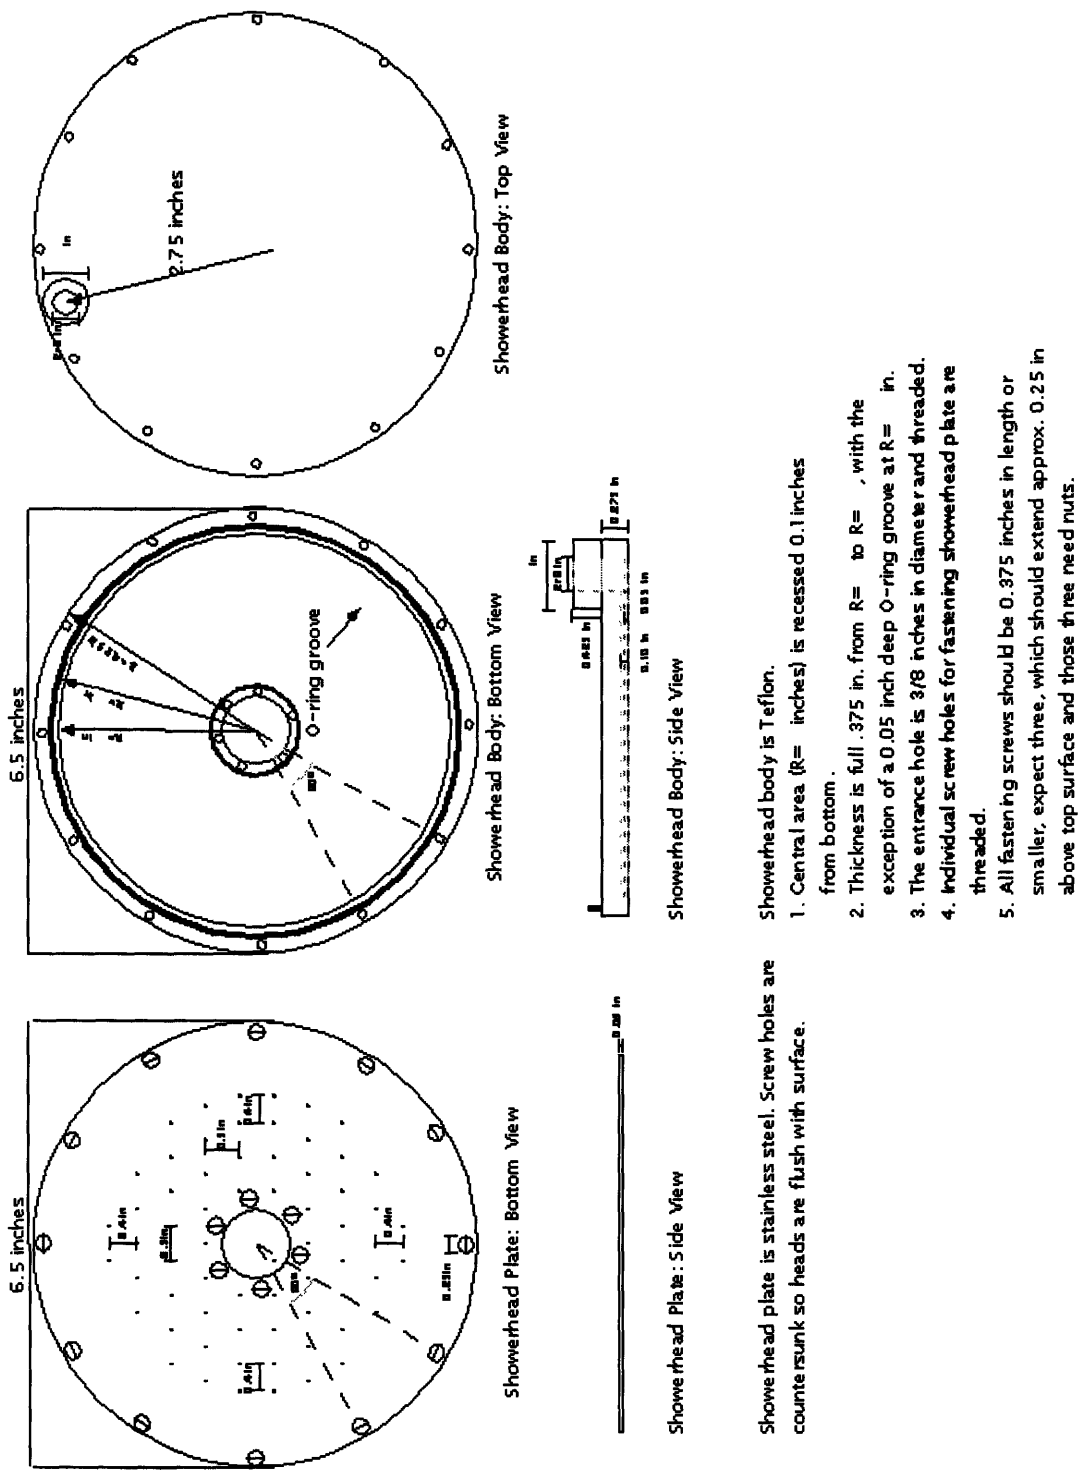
Detailed drawing of redesigned showerhead accommodating ultrasonic atomizer.
